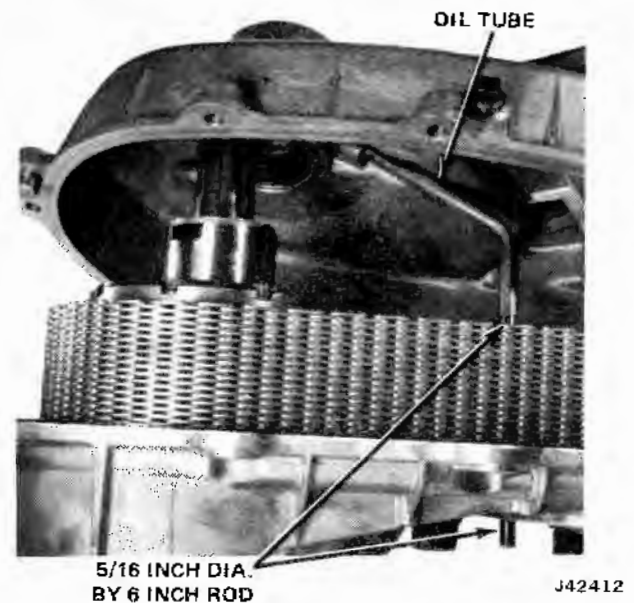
Aligning Oil Tube for Case Installation to Cover Assembly
